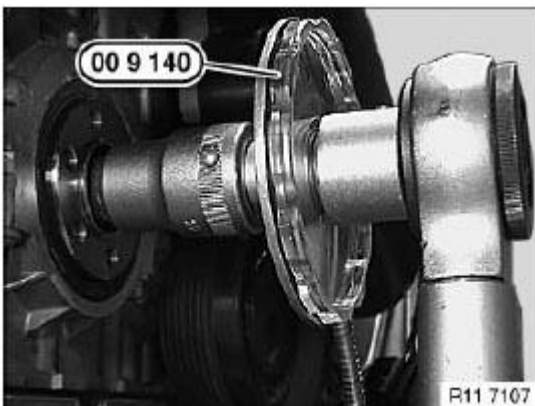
Securing Central Bolt Using Special Tool 00 9 140
